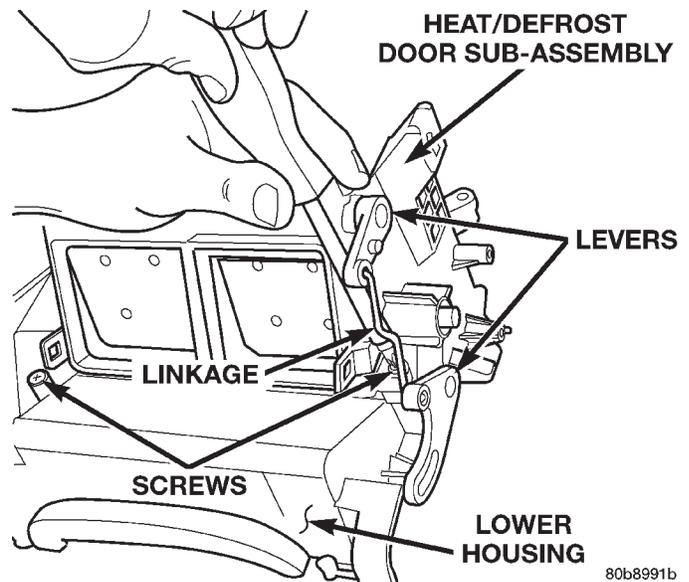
Heat/Defrost Door Sub-Assembly Removal
